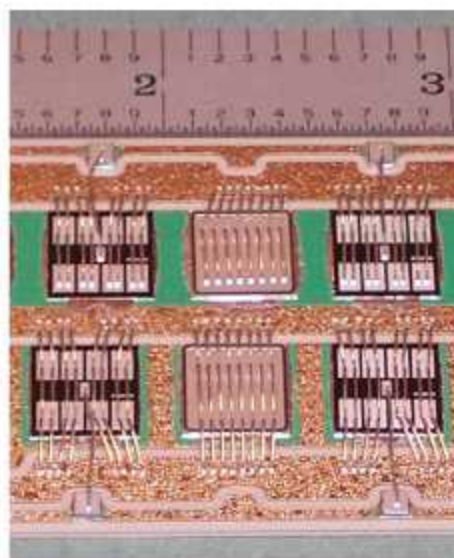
One of three sections of the Semikron board used to produce subassemblies for prototype.
